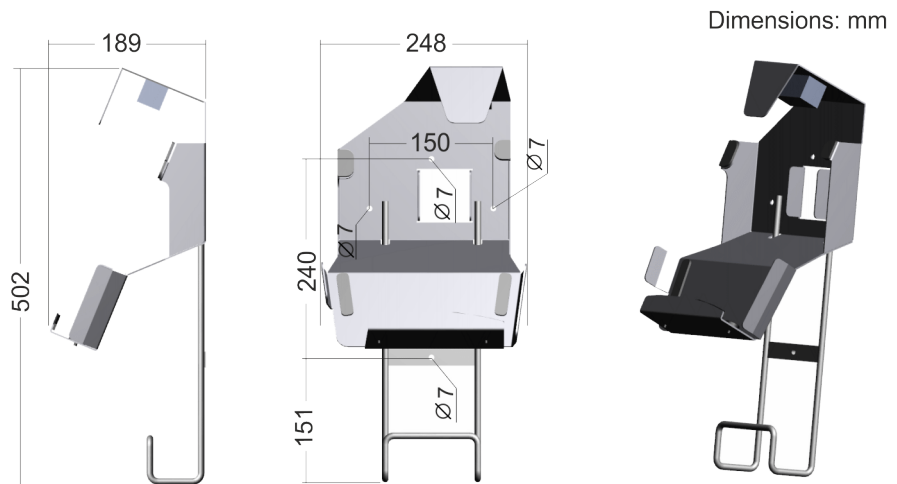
Dimensions and drilling locations for smartPAD holder
